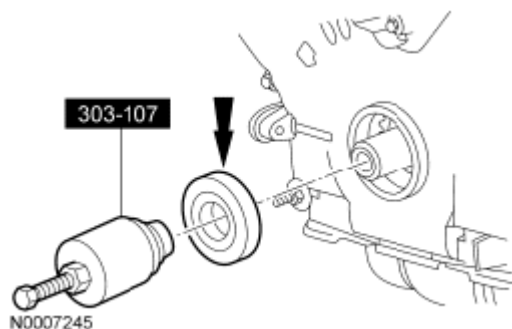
Removing Crankshaft Front Seal Using Crankshaft Front Oil Seal Remover
